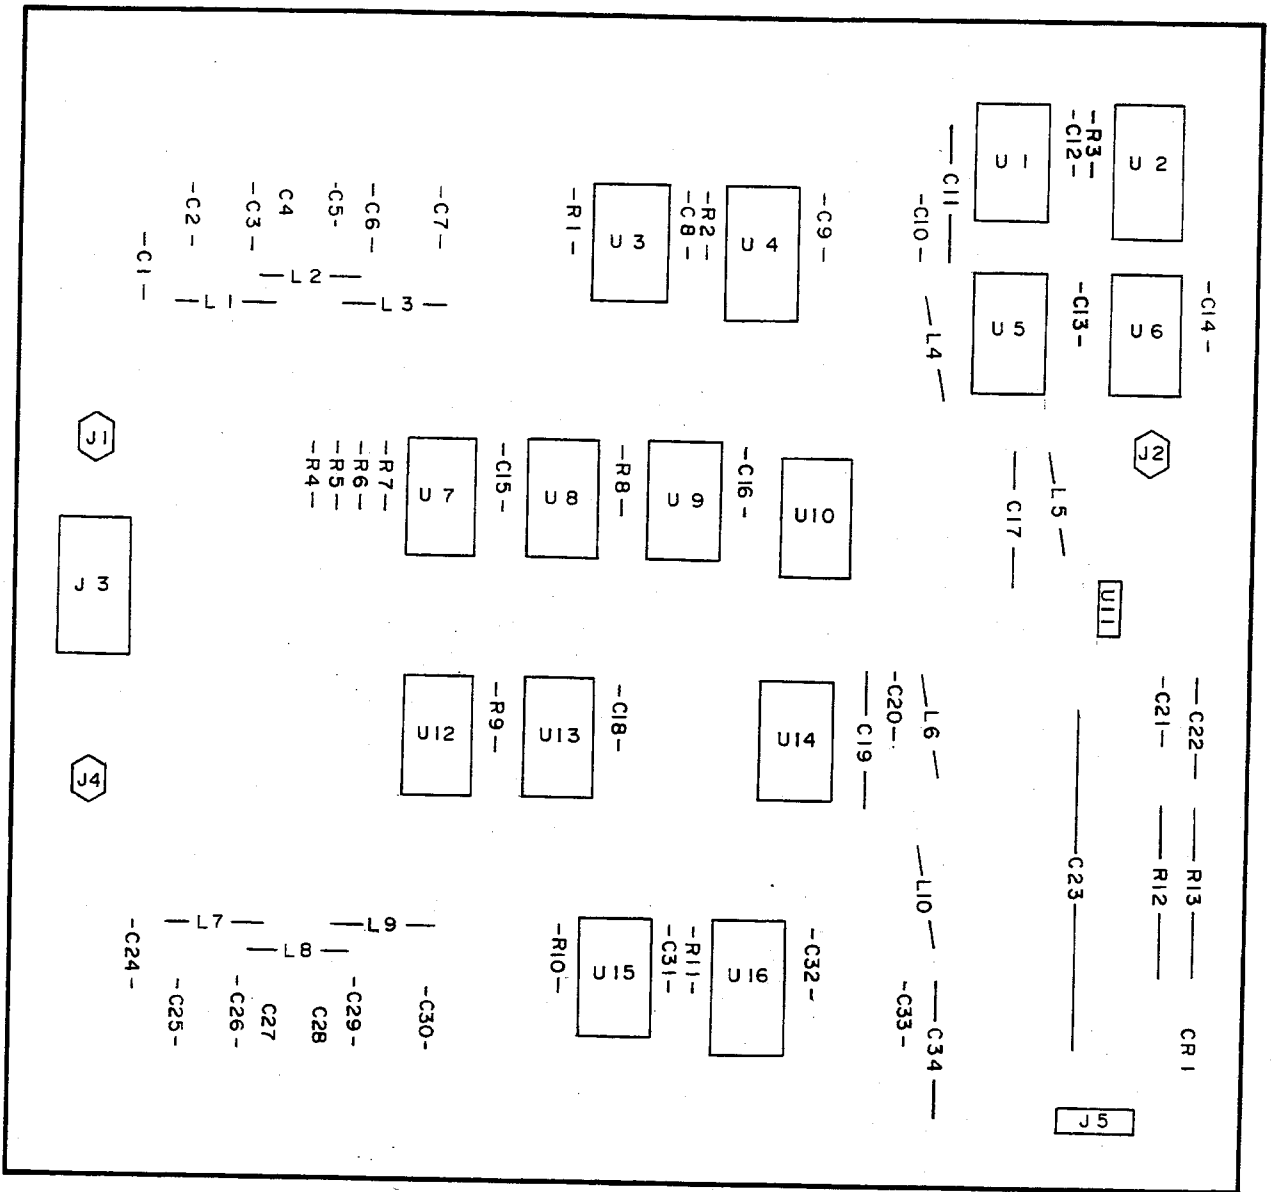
A1 Main Board Assembly/A2 Switching Board Assembly Component Locations
